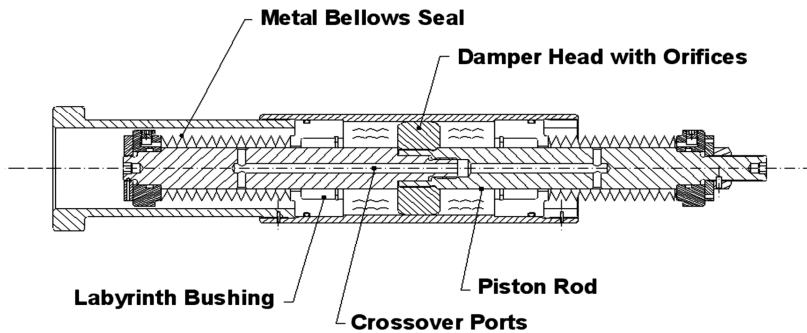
London Millennium bridge damper scaled from space engineering example [Dallard, 2001].
